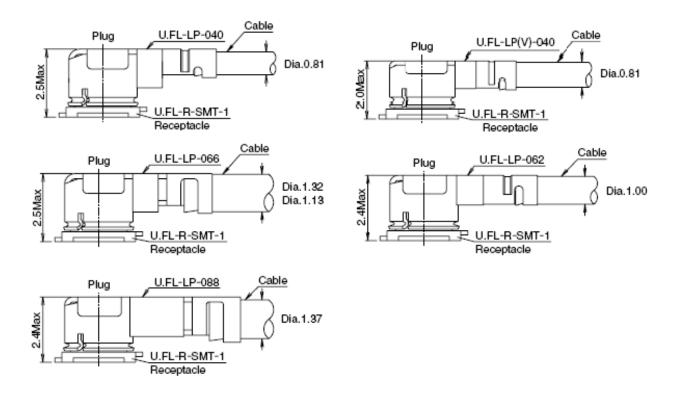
Dimensions of the UF.L-R-SMT Connector (Unit: mm)
